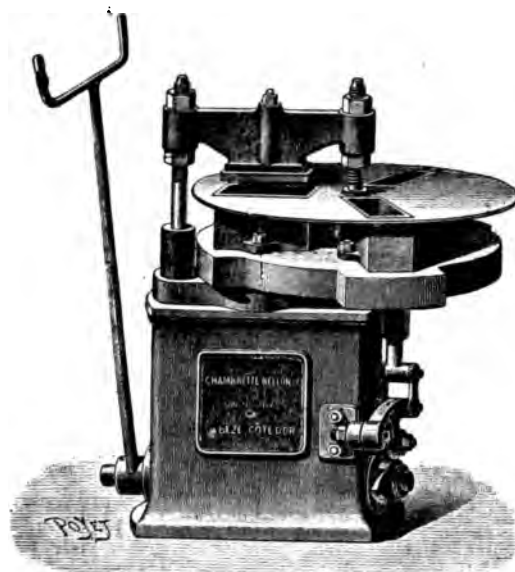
Hand Press for moulding Coarse Clay (Chambrette Bellon).
